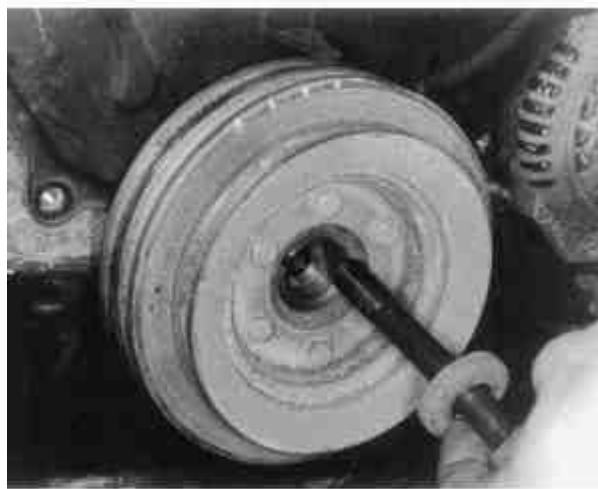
View of the crankshaft pulley — note the pulley is keyed for correct installation
